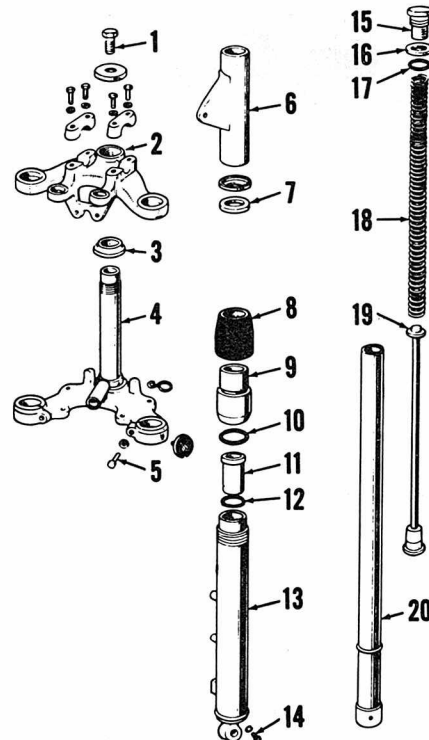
Exploded view of G4TR front suspension unit. Others are similar.
